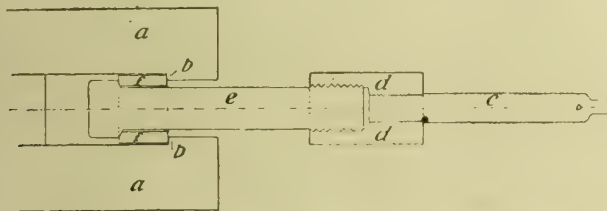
PLAN (SECTION) OF HEADS AND HOLDERS ON TESTING MACHINE, SHOWING METHOD OF ATTACHMENT TO BAR.
